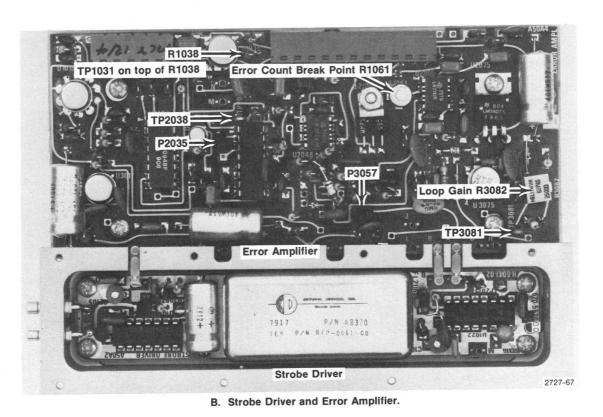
Adjustments and test points locations in the Phase Lock module.
